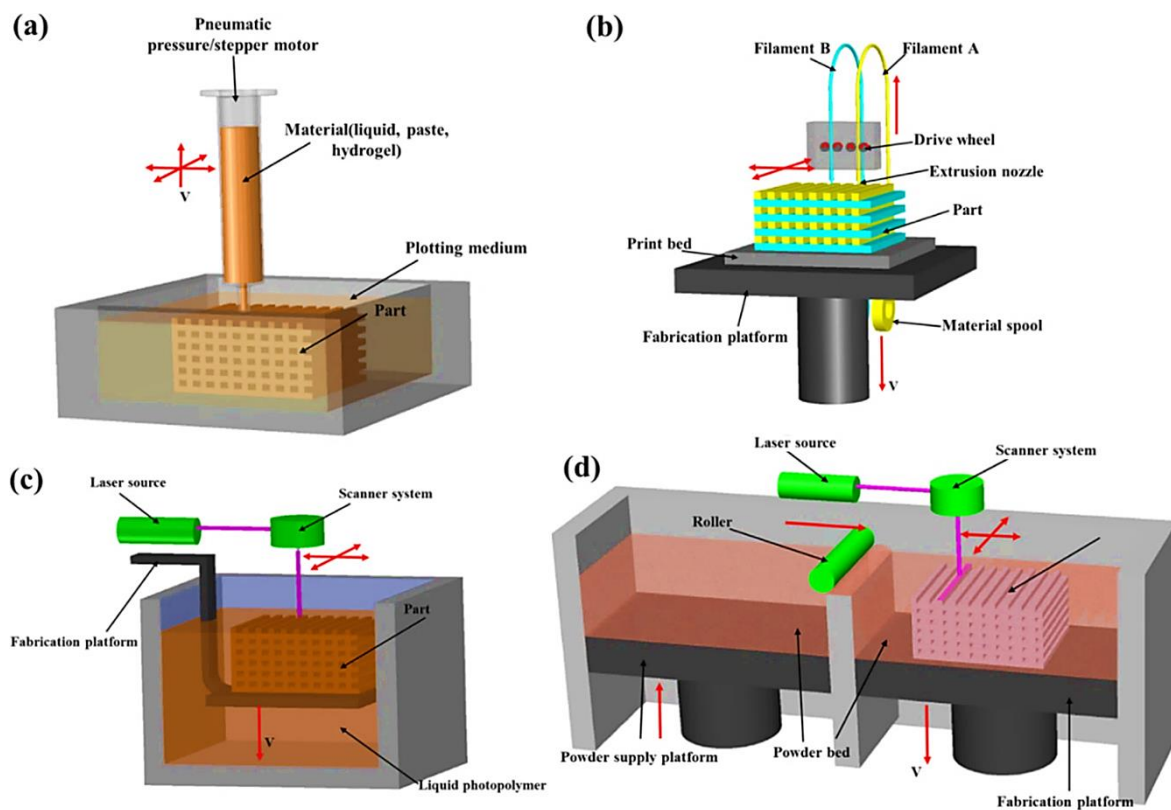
Graphic representation of (a) direct ink writing (DIW); (b) fused deposition modeling (FDM); (c) stereolithography (SLA); and (d) selective laser sintering (SLS) techniques for three dimensional printing [19]. Reproduced with permission from Elsevier
